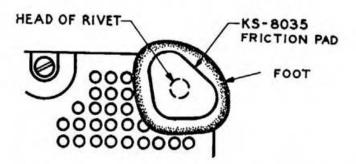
Base Plate with Foot and Friction Pad Assembled
